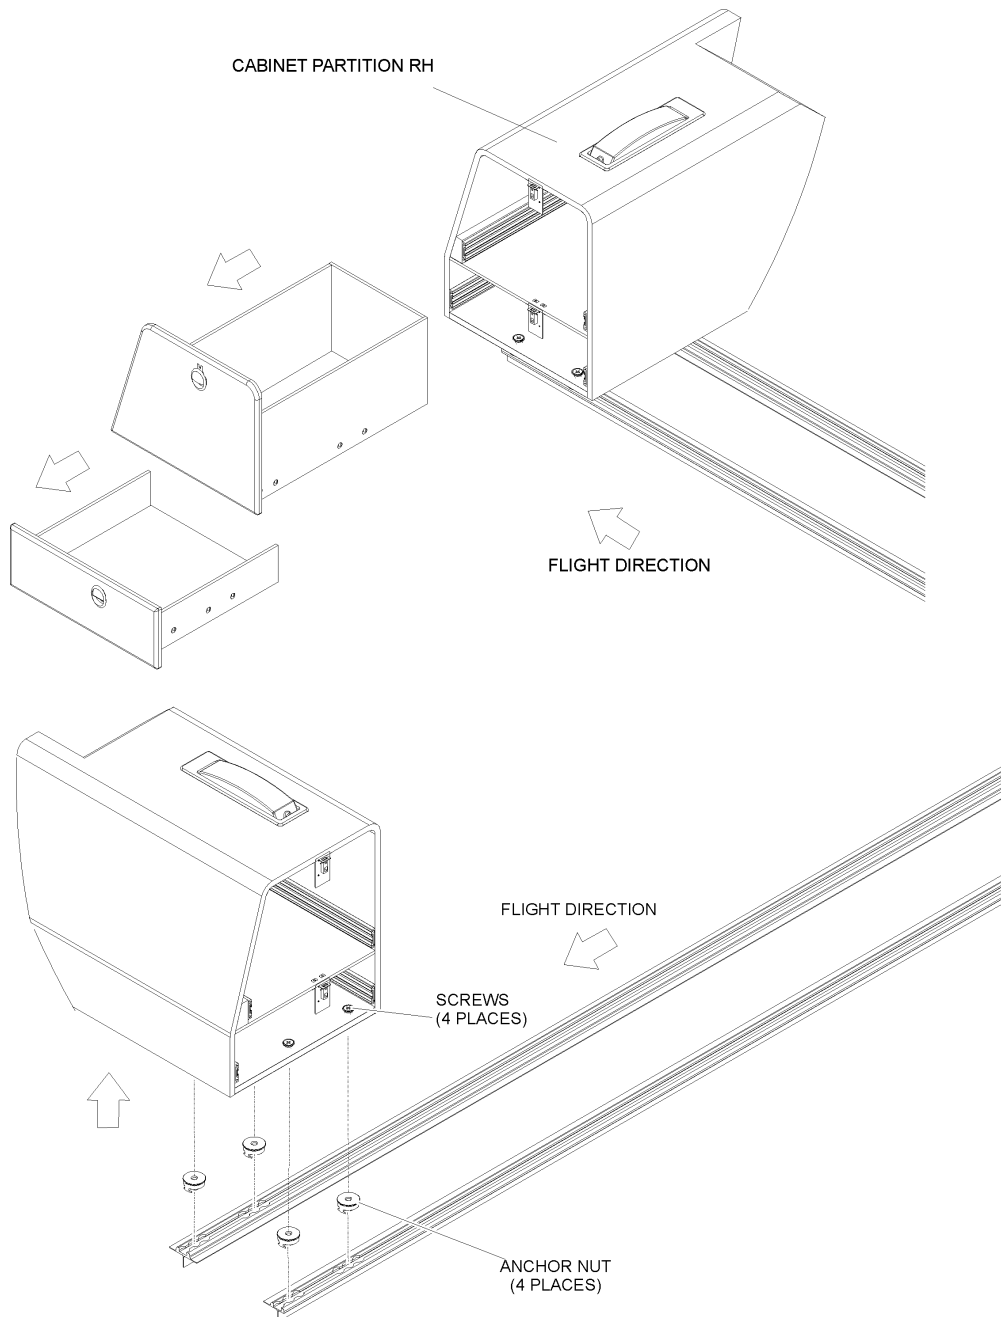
Cabinet Partition RH (Ferry Flight Configuration) - Removal
